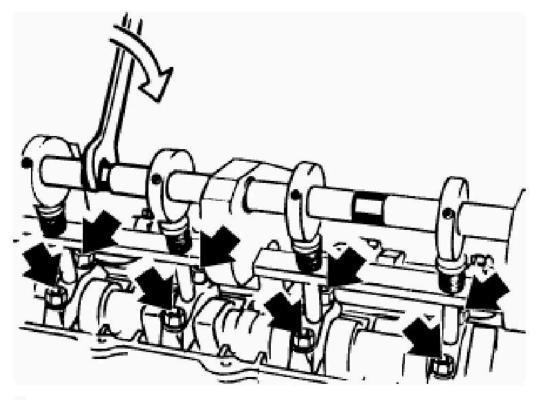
Fitting Special Tool 11 3 260 Into Spark Plug Threads Courtesy of BMW OF NORTH AMERICA, INC.
